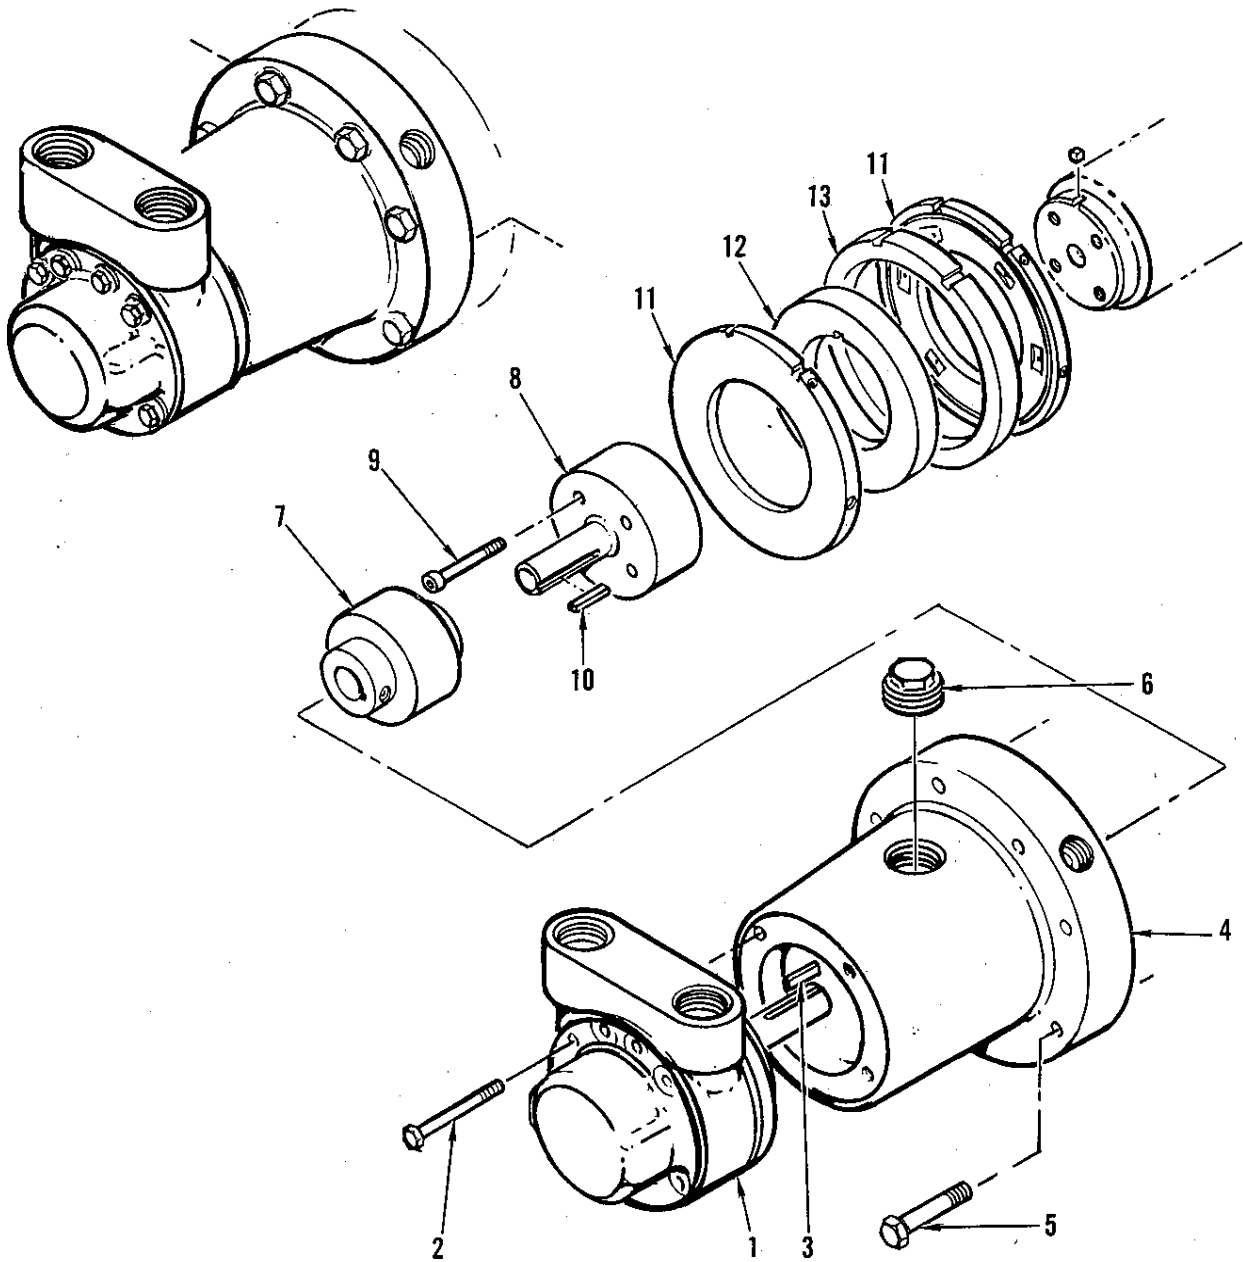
Thrust Bearing and Pump Assembly, Exploded View.
